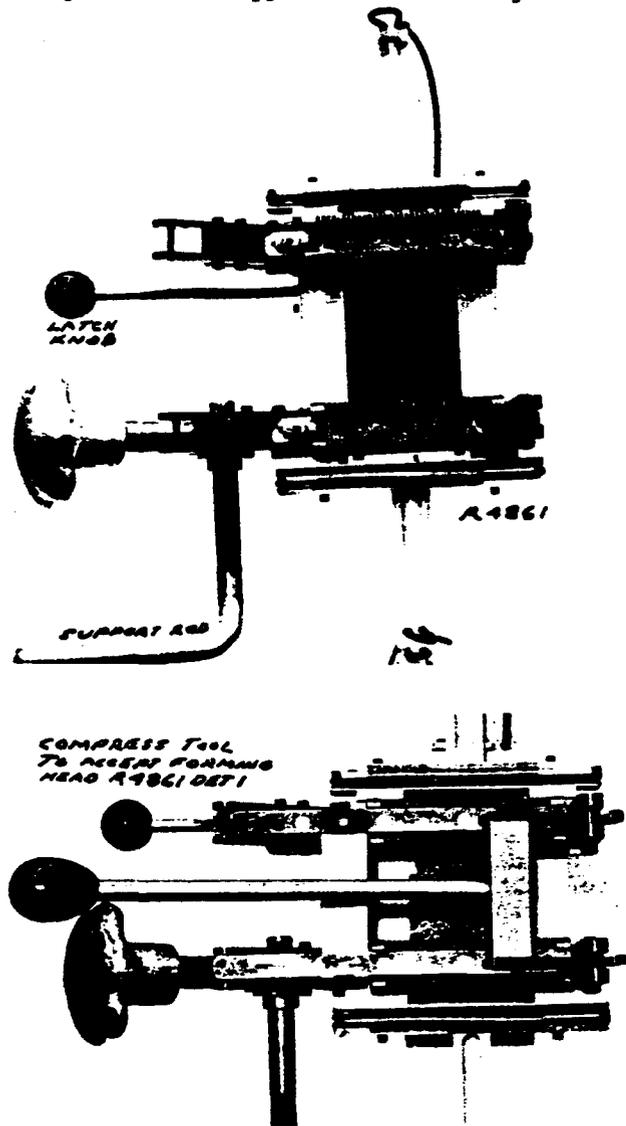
R4861 TOOL AND FORMING HEAD (PAR. 3.242)
